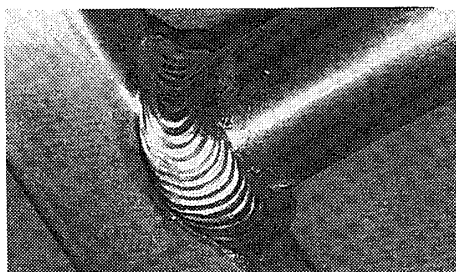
Example of AC pulse MIG welding superposed low frequency pulse control
